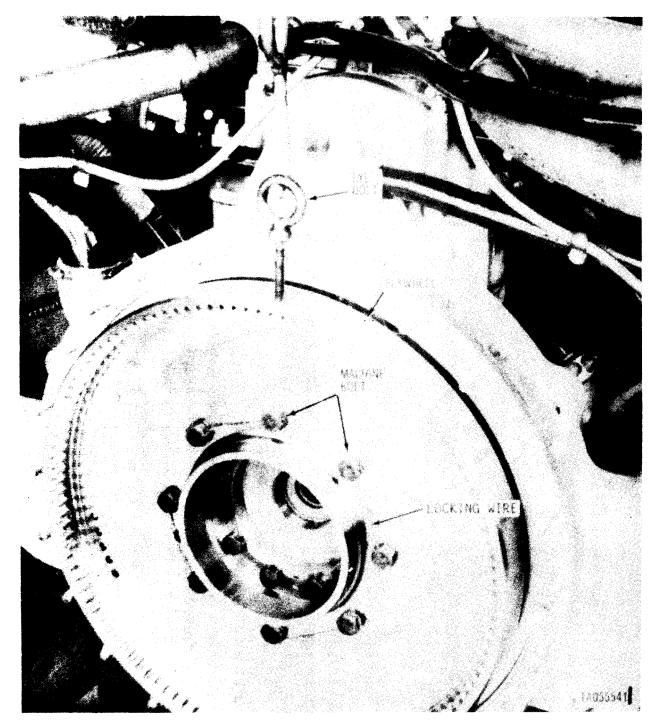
Removing or installing flywheel, model AVDS-1790-2DR engine.
